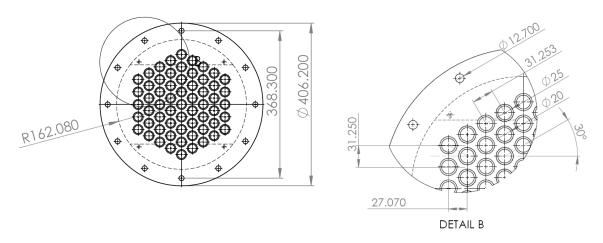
TUBE BUNDLE CROSS VIEW
